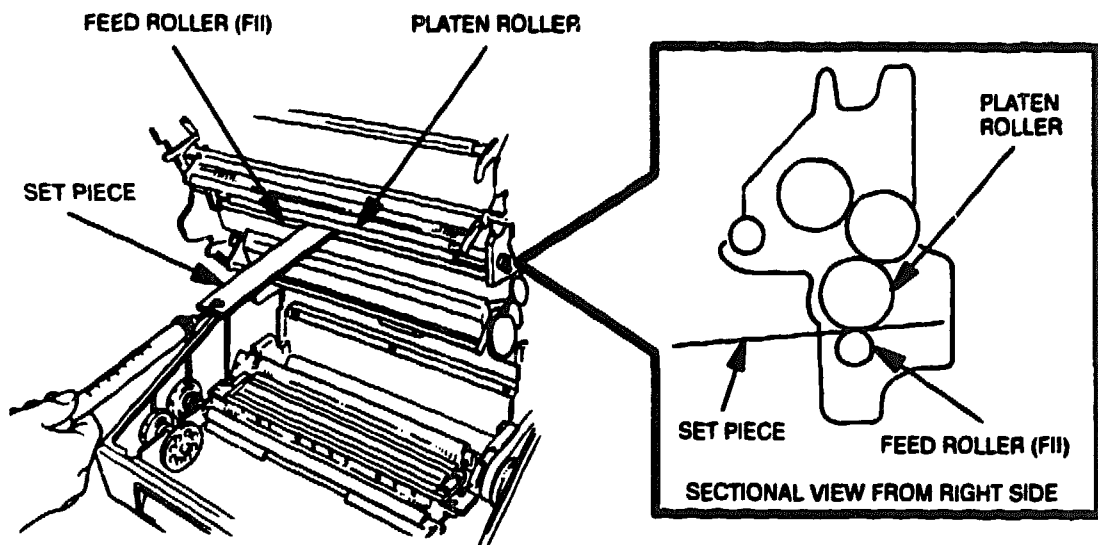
Platen Roller and Feed Roller (FII) Friction Measurement
